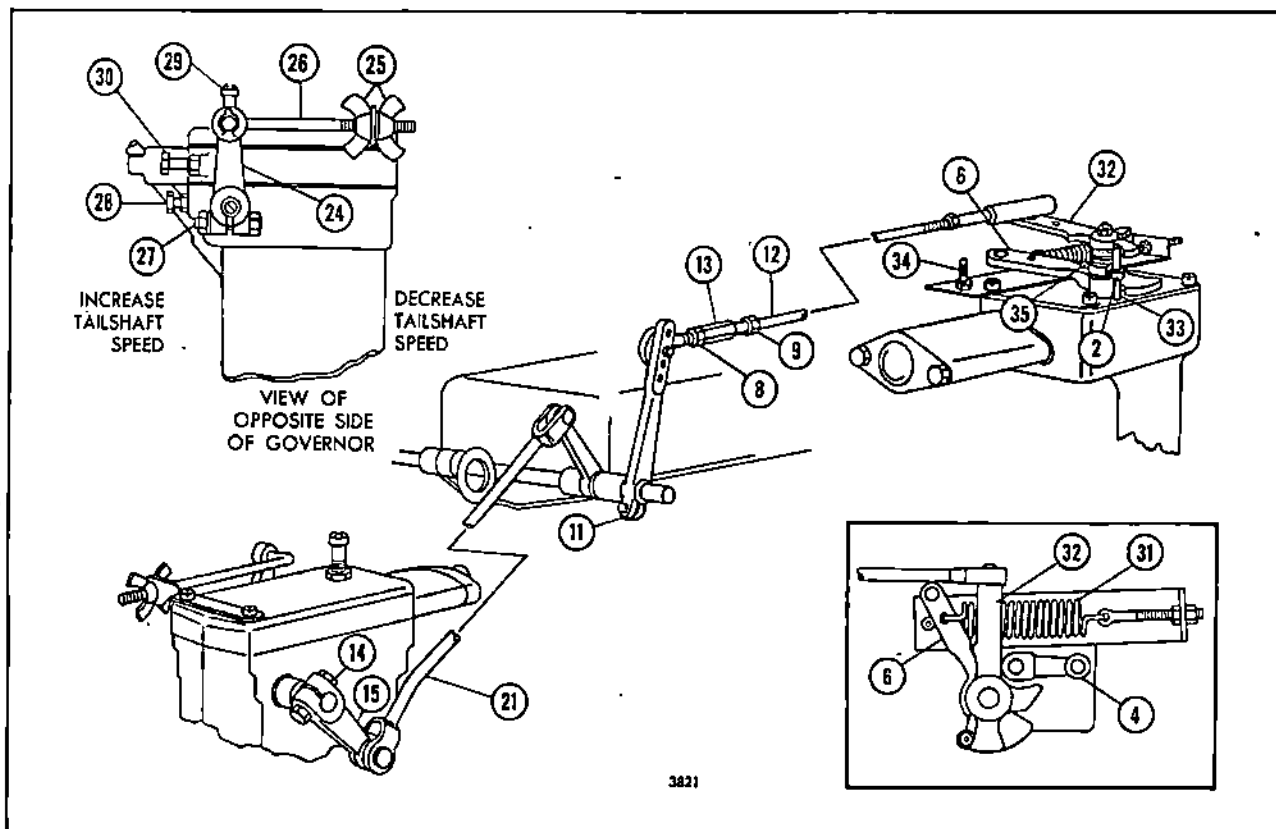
Hydraulic Output Shaft Governor and Linkage (Type A)
